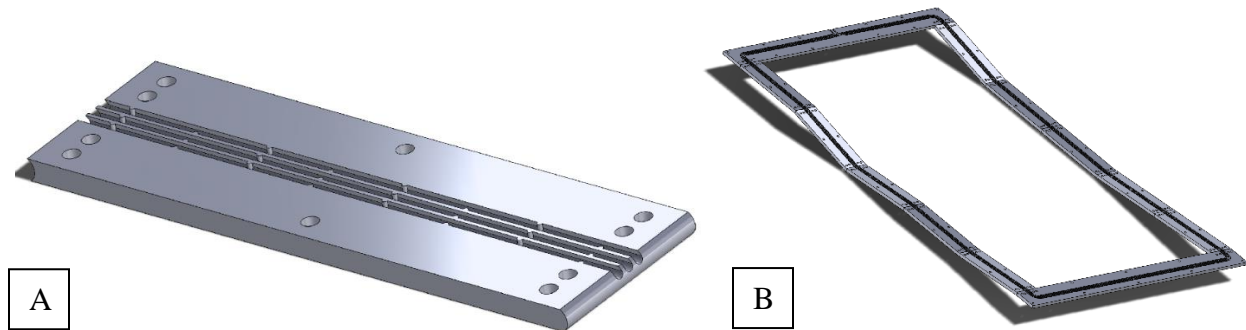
Solidworks schematic of PVC housing for in-stream antenna. (A) Zoomed in view of single modular segment showing inner channels and bumps. (B) View of housing assembly.
